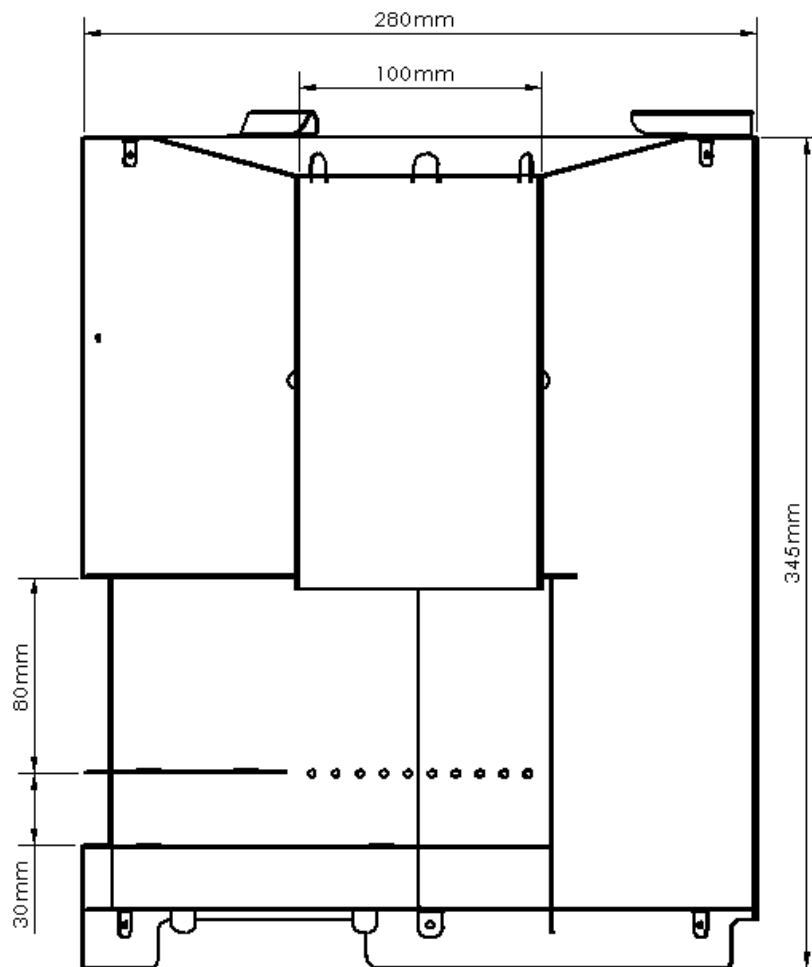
SFR 9 natural draft cookstove cross-sectional view and dimensions
